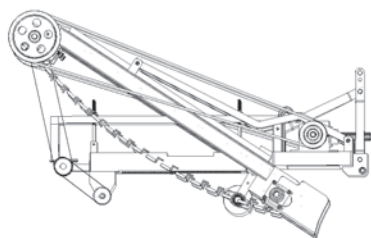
Side view of tractor operated mat type nursery sowing seeder
